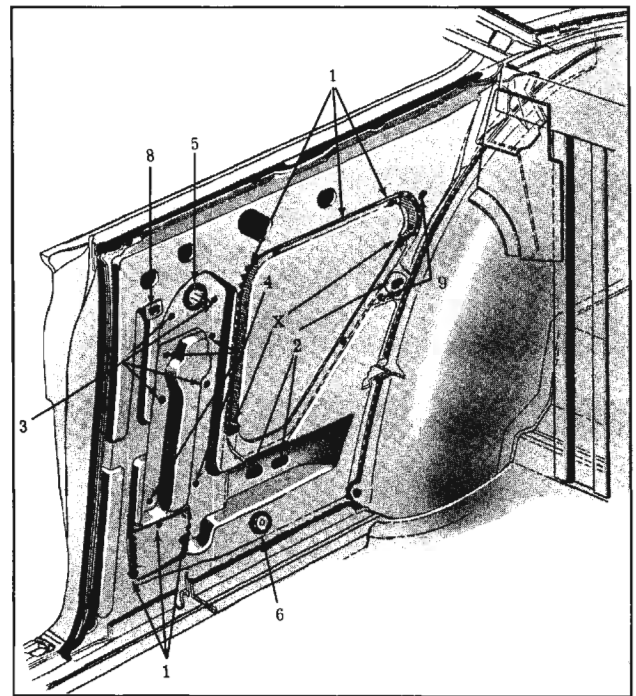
Inner Panel Sealing ("47" and "57" Styles)
